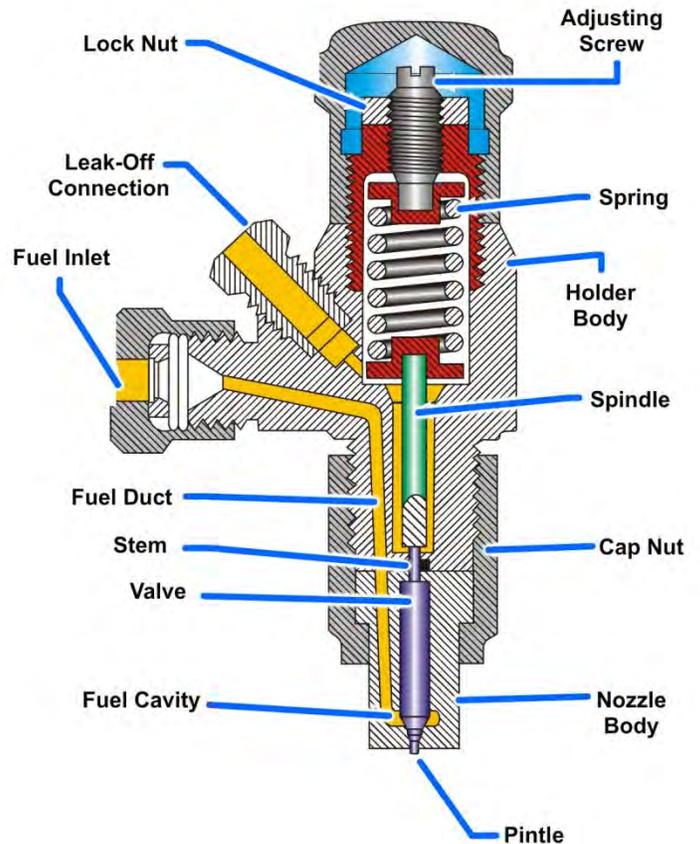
Sectional view of a Bosch injection pintle-type nozzle assembly.
